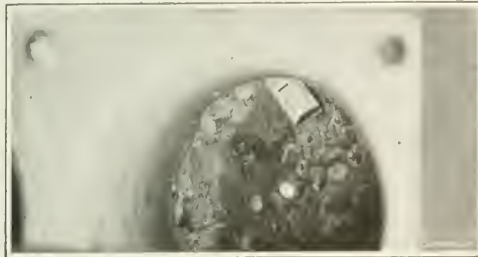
Rough Condition of Inside of Dome of Improperly Welded Cylinder
